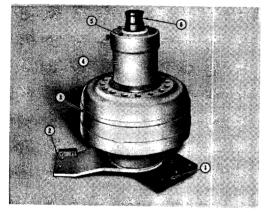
AXLE ASSEMBLY, REMOVED
